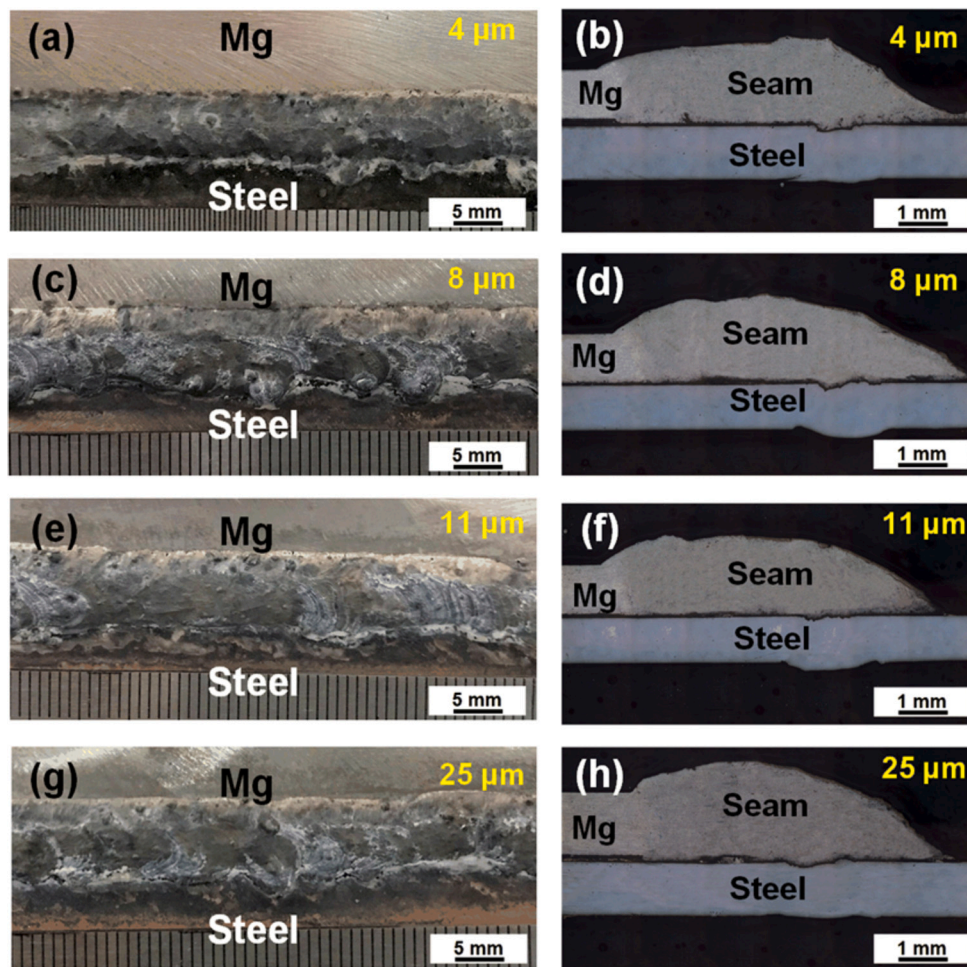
Mg-Steel laser welding-brazing appearance and joint cross-section morphology with different Cu coating thickness.
